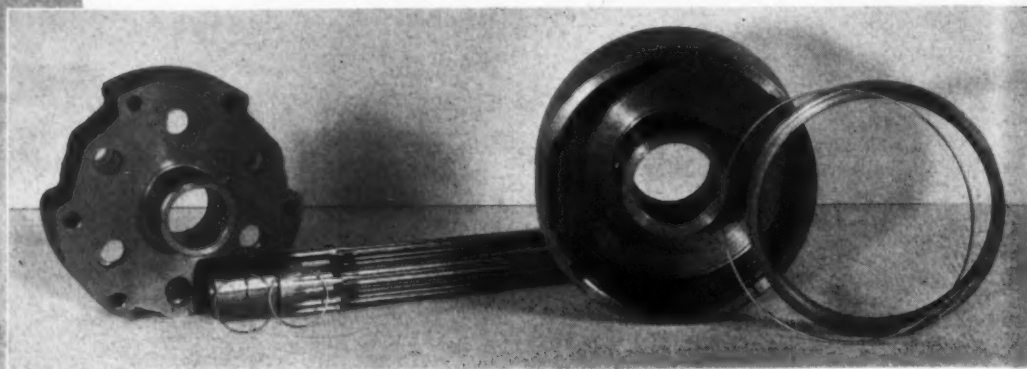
Left—Planetary transmission cage assembly after induction brazing. Two brazing rings are used
